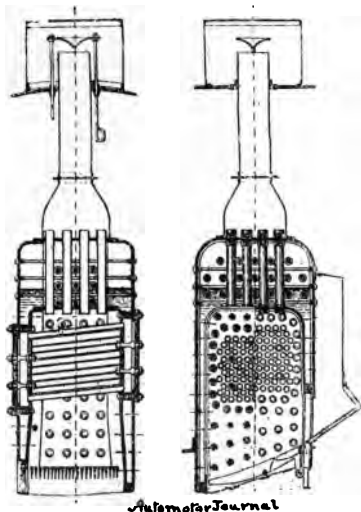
THE TOWARD GENERATOR: VERTICAL ELEVATION.
